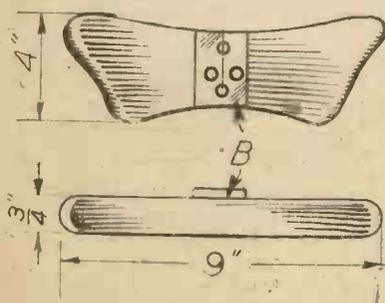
Two views of the knee-grip, and details of fixing plate and screws.
